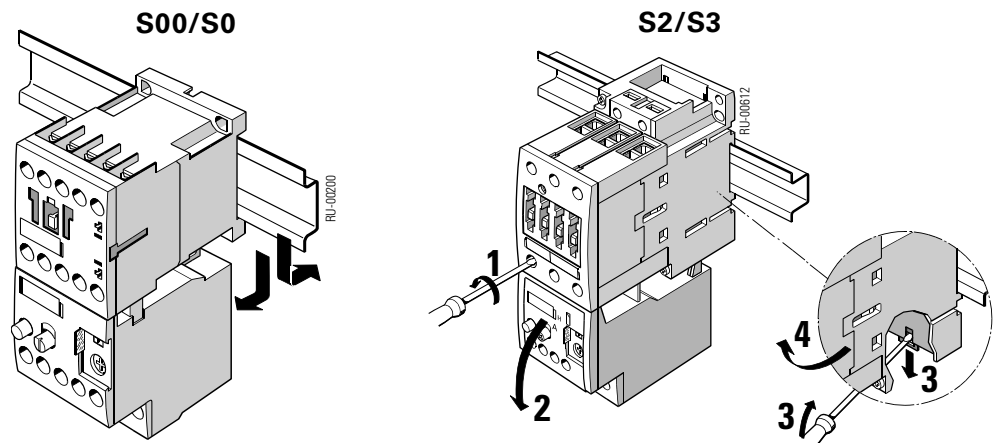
Snap-on mounting and removal with the 3RT contactor
